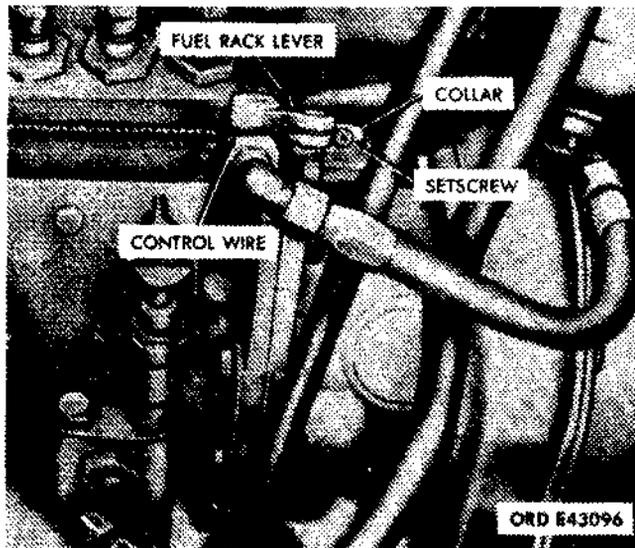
Removing emergency fuel shutoff control wire—diesel only.
